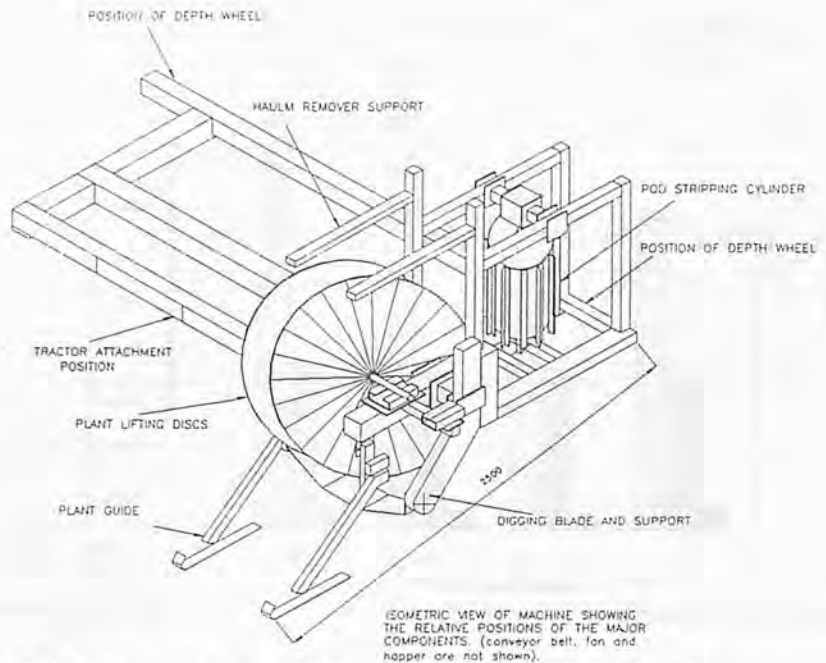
An isometric view of the proposed groundnut harvesting machine.
